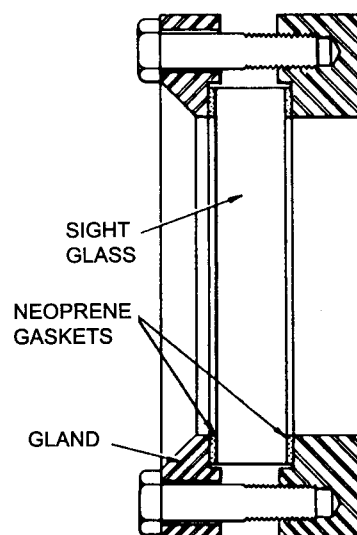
SIGHT GLASS ASSEMBLY – ABSORBER SHELL
